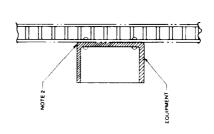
A11. Equipment mounted on metal joiner bulkheads.
